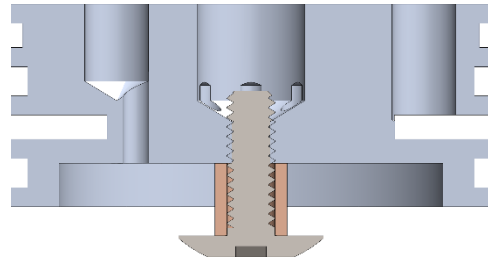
Basic groove-manifold scribble injector (Shown in section plane with fuel inlet and igniter pass-through holes)
